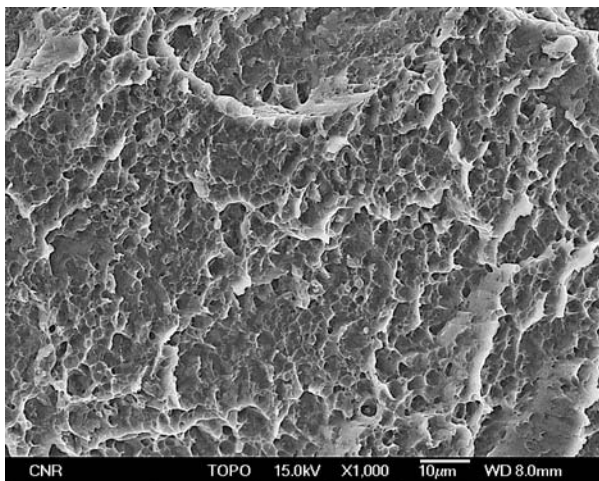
Fracture surface of the FSP AM60B alloy revealing the disappearance of the casting defects.
